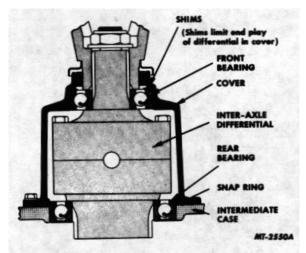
Cross-Section Showing Shims Used To Control Inter-Axle Diff End Play
